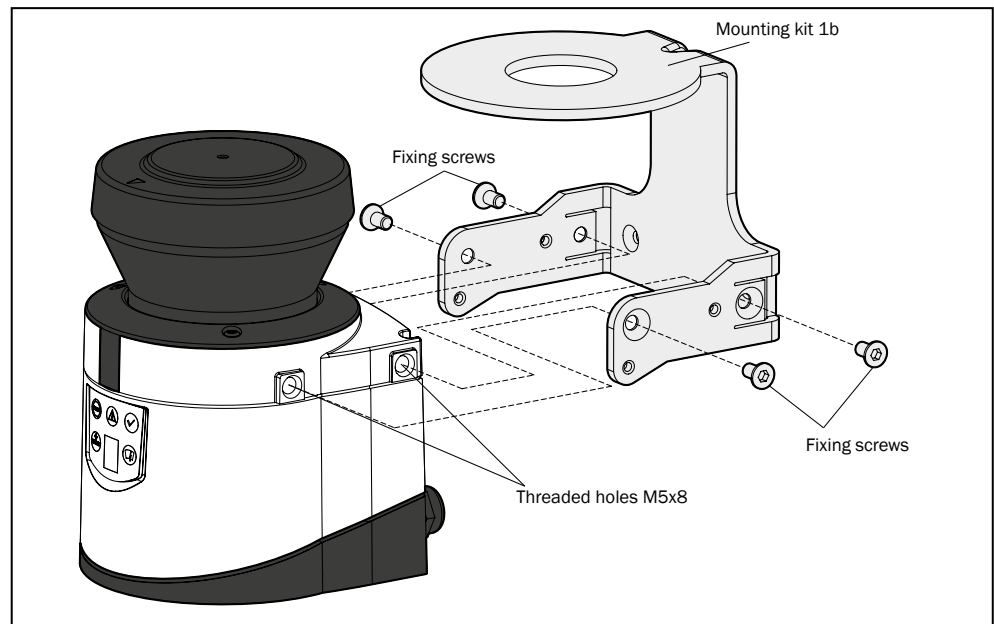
Mounting with mounting kit 1b (part no. 2034325)
